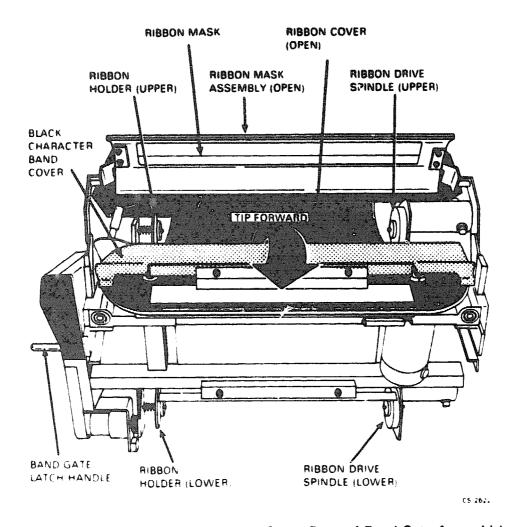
Ribbon Mask Assembly, Open (Rear of Band Gate Assembly)
